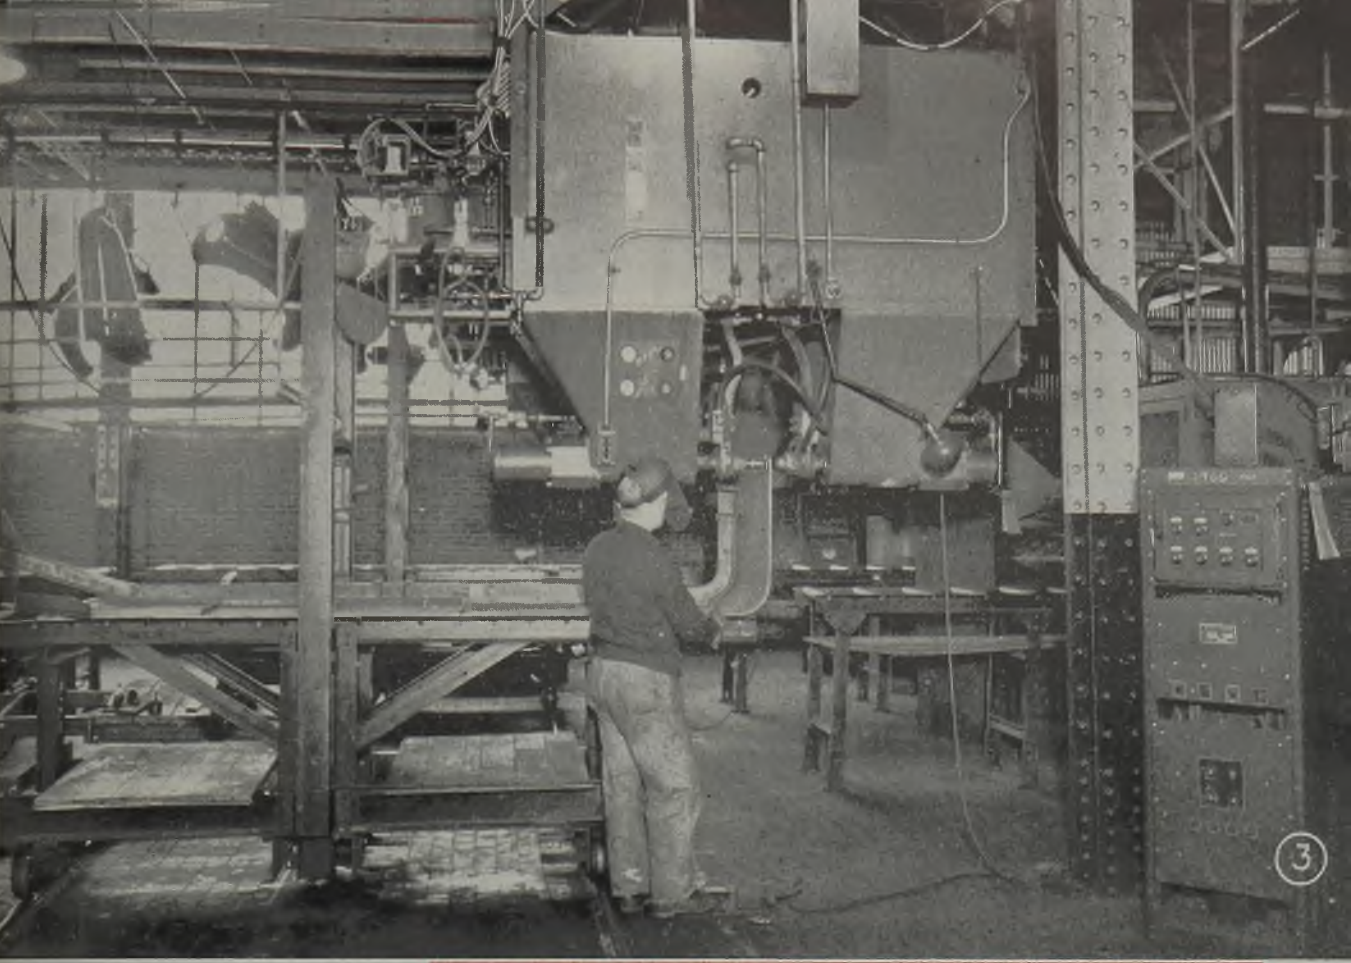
Here welder is suspended from ceiling with throat opening downward to permit attaching brackets, etc. to the short leg of the L-shaped panel without need for a hoist. Note transfer conveyor for moving assembly through machine and over to gravity-type conveyor in background
